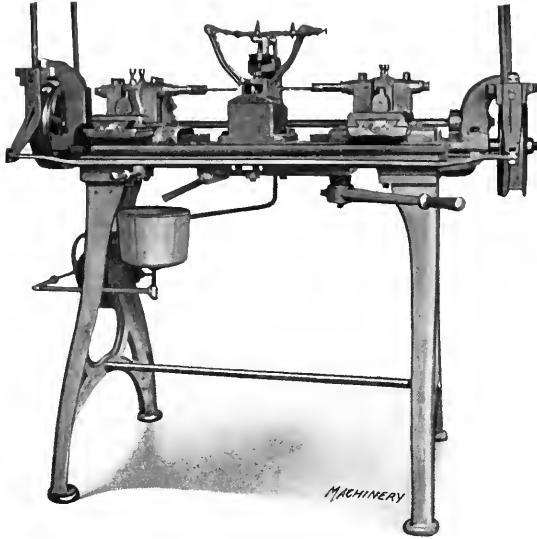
Front View of Langelier Four-spindle Drilling and Tapping Machine
